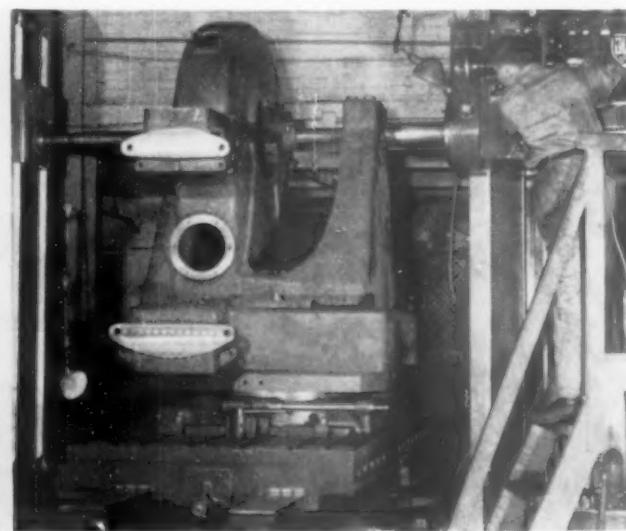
Machining of an awkward elevator gear housing is facilitated by mounting on a power driven rotary table. Eleven operations are performed on this workpiece at one setup.
